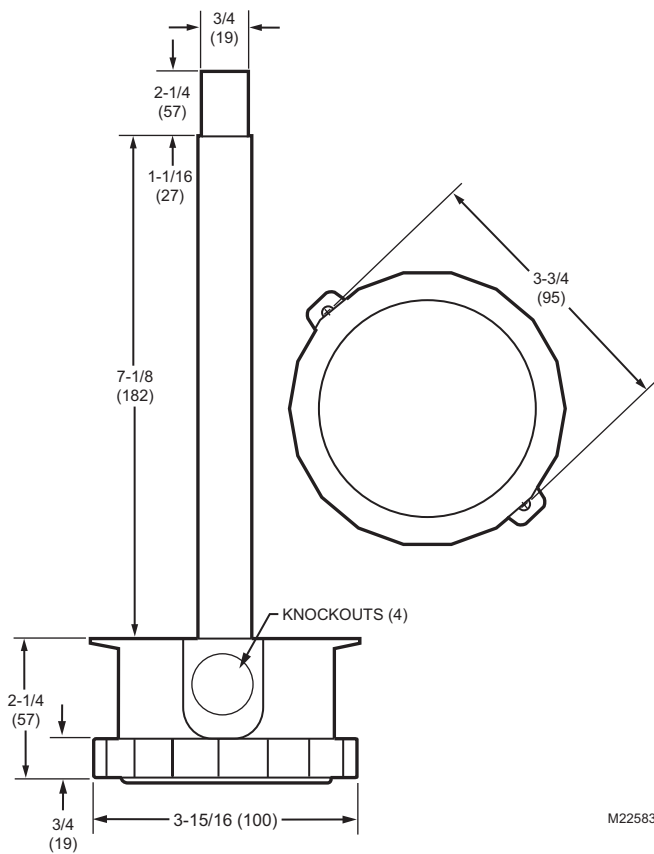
Duct-mount sensor dimensions in in. (mm).
